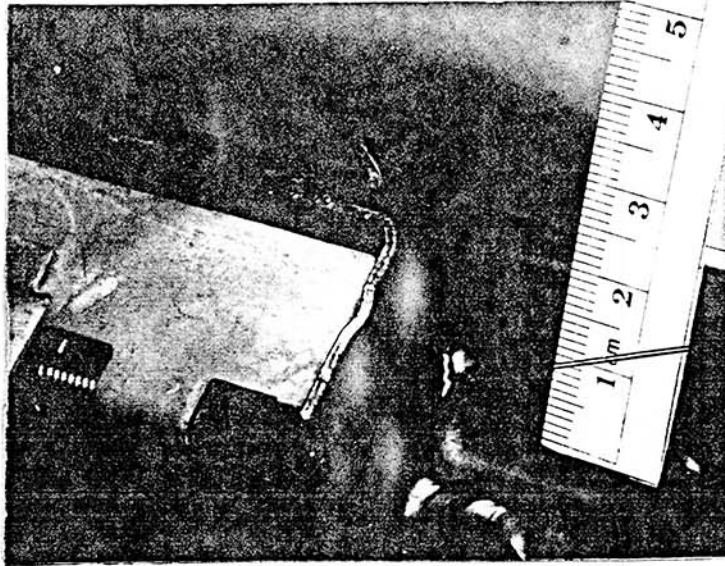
Receiver (referenced Component No. 1), machine gun 5.56-mm, M249, SN 002437: magnetic particle crack pattern noted before firing showing a 0.6-cm crack in bottom front magazine well weld (arrow).
